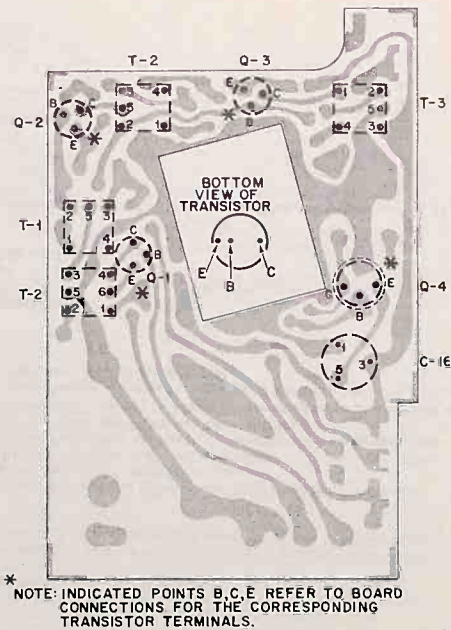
PRINTED CIRCUIT CHASSIS DIAGRAM (BOTTOM VIEW)
